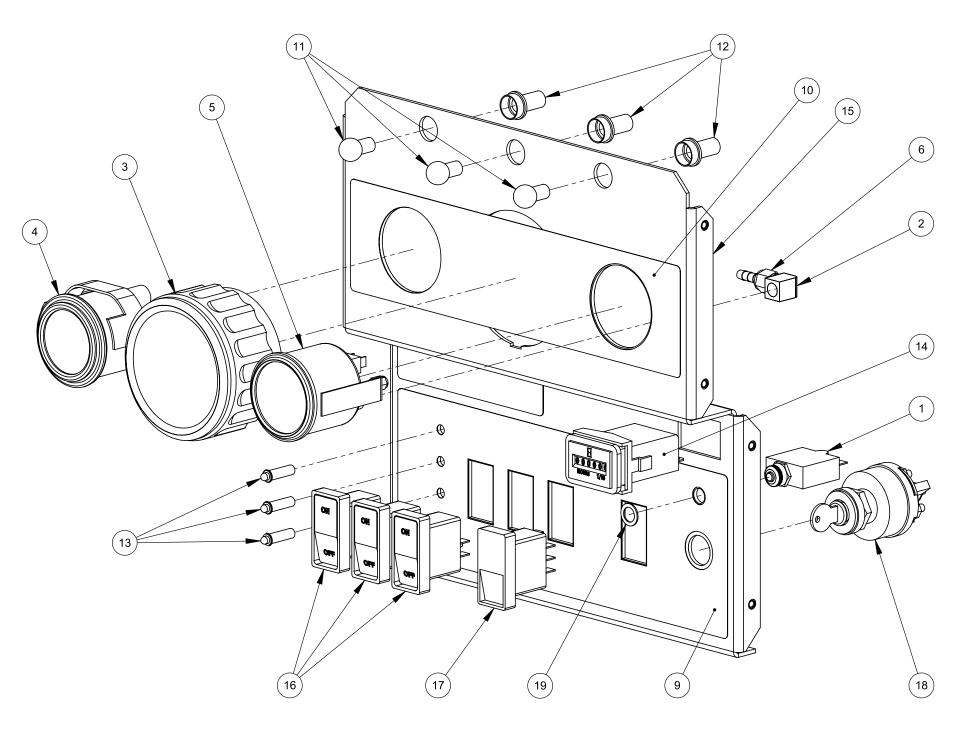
Dash Panel Assembly 601-020-701 Rev. D
